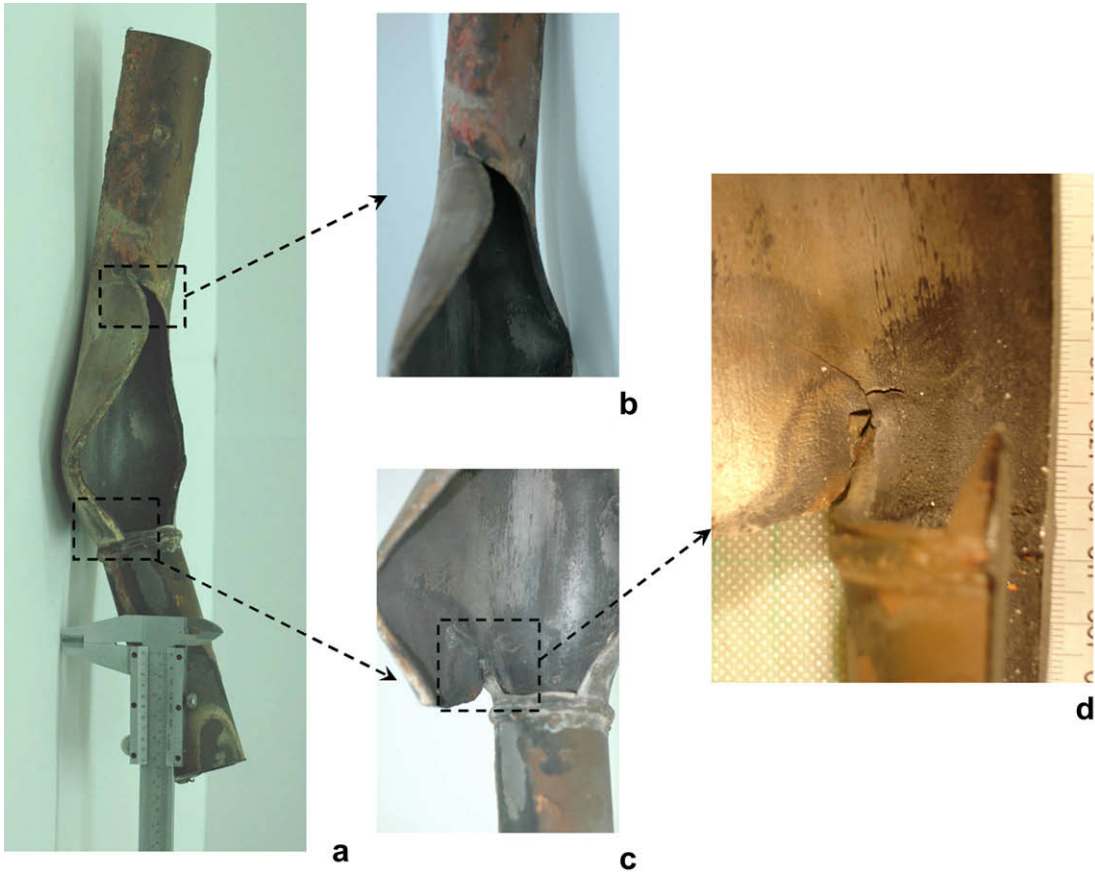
Macrographs of the failed-tube retrieved from area of the pipeline with circumferential weldment: (a) total view of the retrieved part, exhibiting a “cobra” appearance and (b–d) zooming of characteristic areas, indicated in (a).
